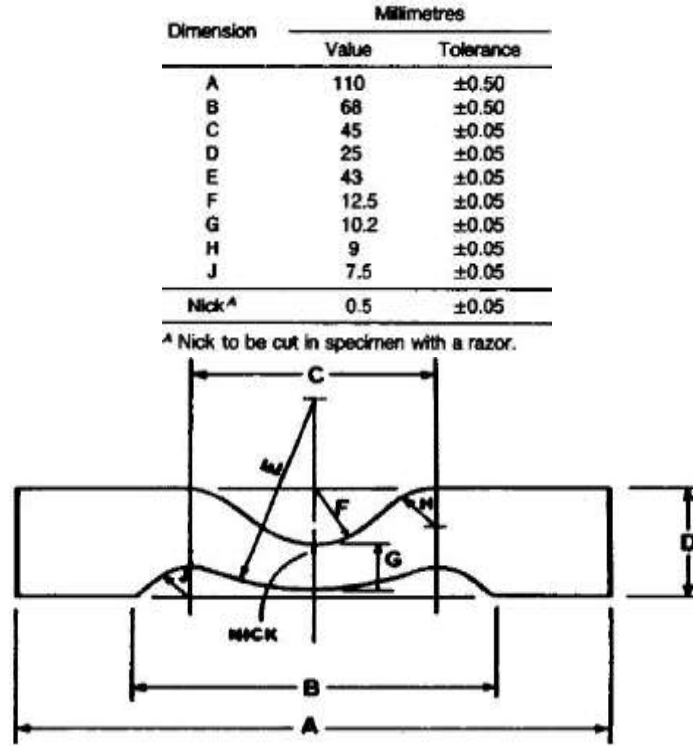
Tear Specimen, Type B, according to ASTM D 624[16].
